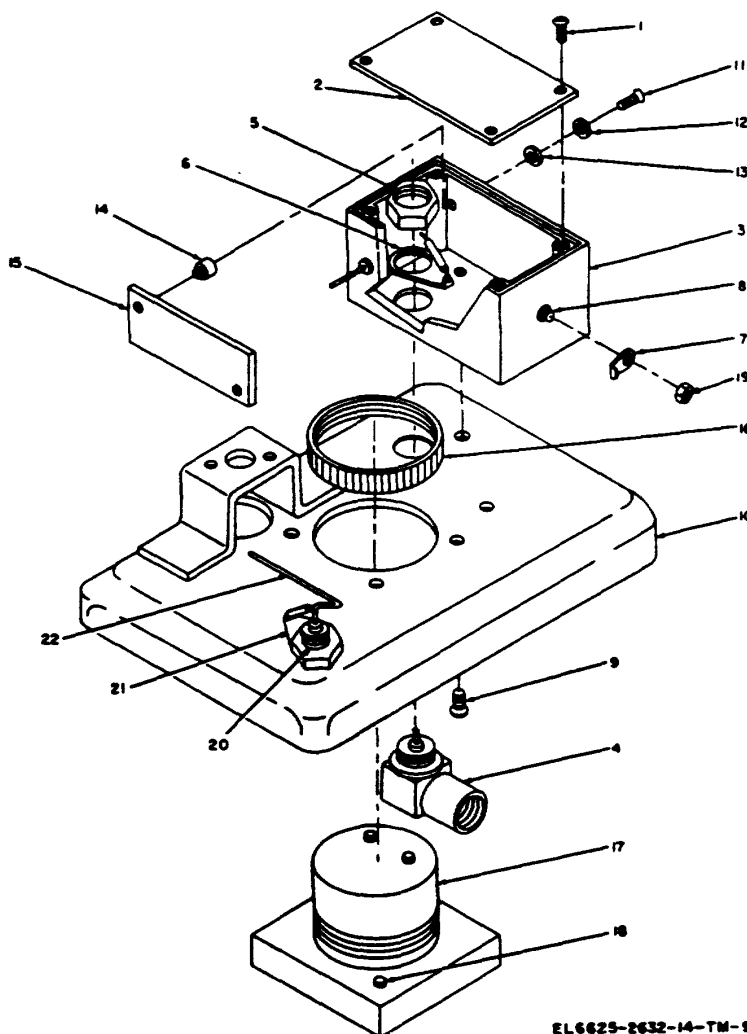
Radio Test Set AN/PRM-32 panel assembly.
